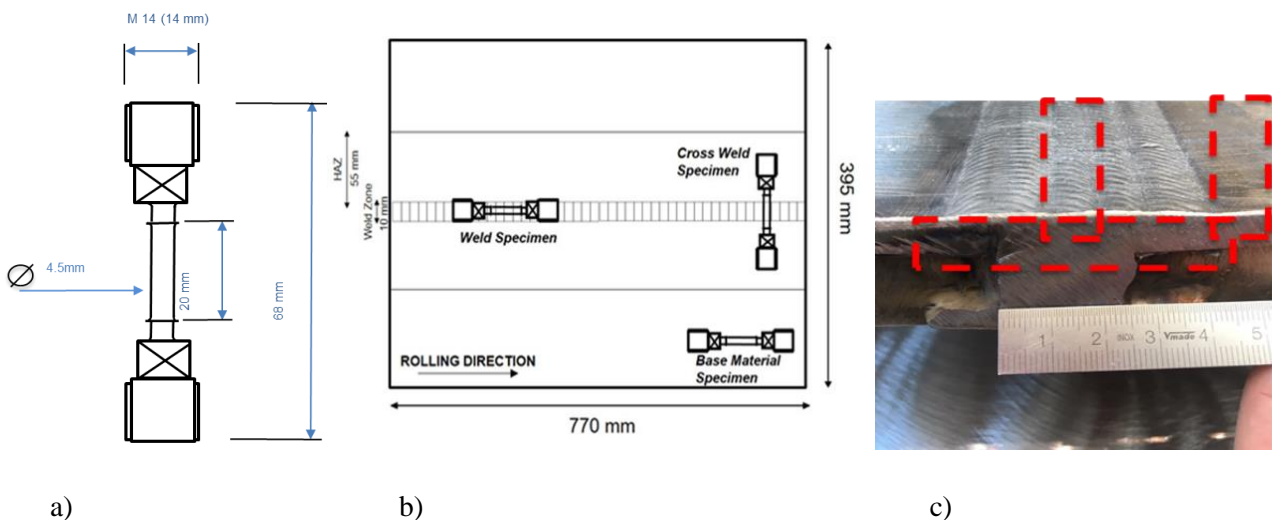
a) drawing of the sample b) extraction of the samples from the 316L welded plate c) picture of the 316L welded joint
